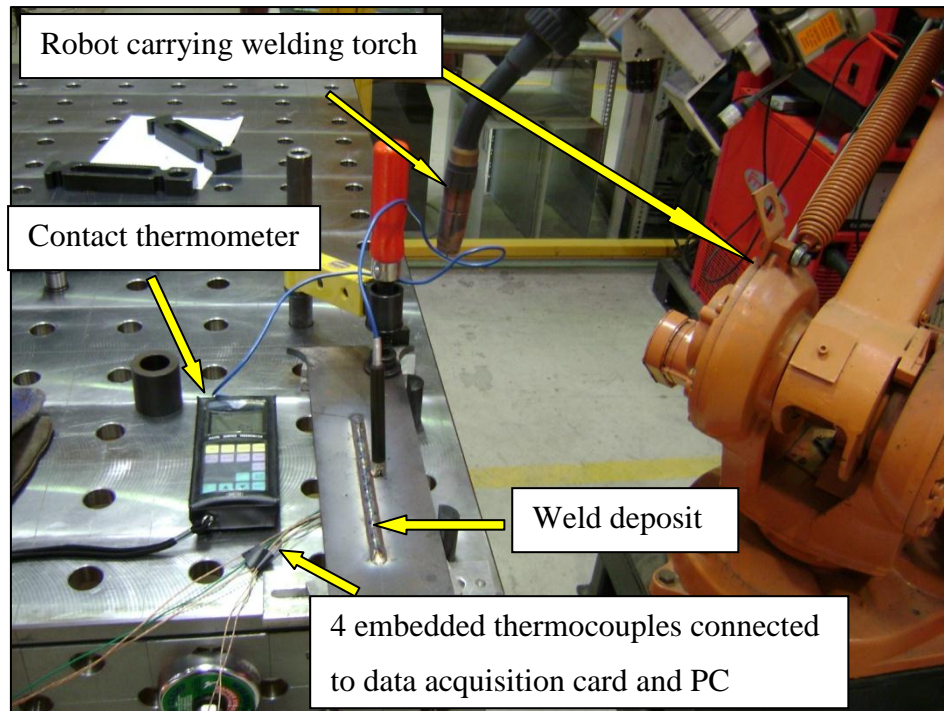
Test set-up used to record weld thermal cycles.
